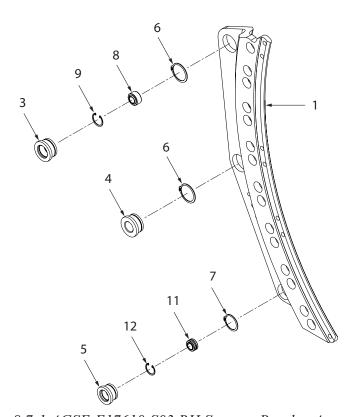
AGSE-E17610-S03 RH Support Bracket Assembly
